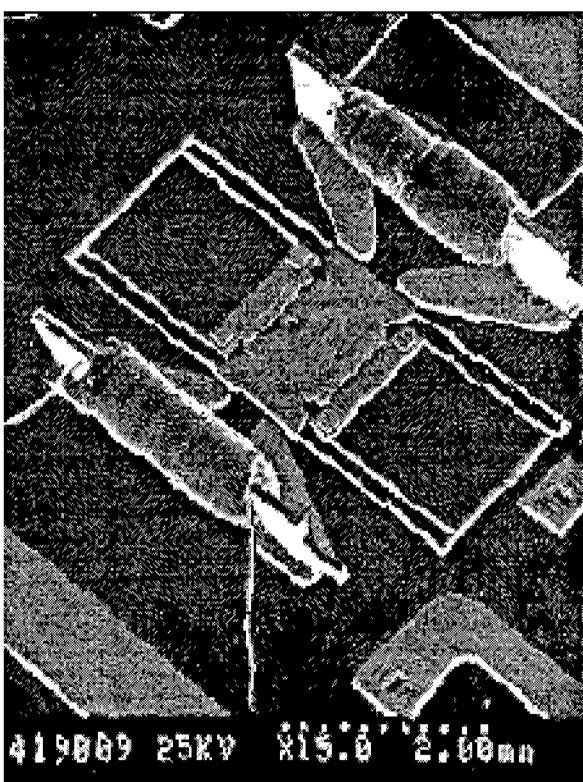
Assembled magnetic linear actuator. The coils are inserted into "spring fittings" and the shuttle/suspension assembly is inserted onto mounting pins located at the suspension anchor points. Source: Guckel et al., 1996b.
